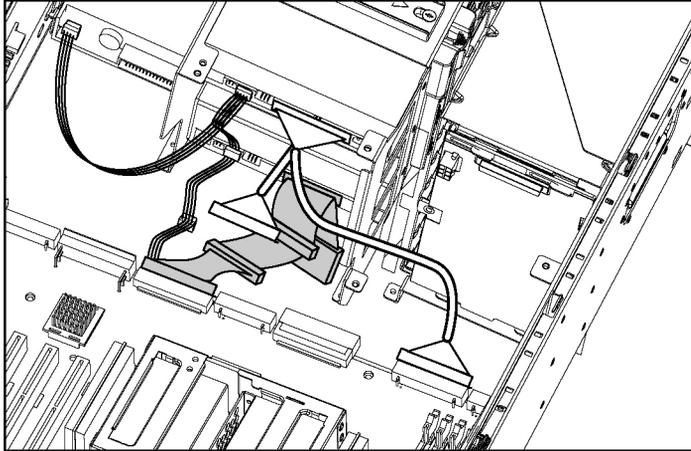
Cabling an internal tape drive to SCSI port 2
